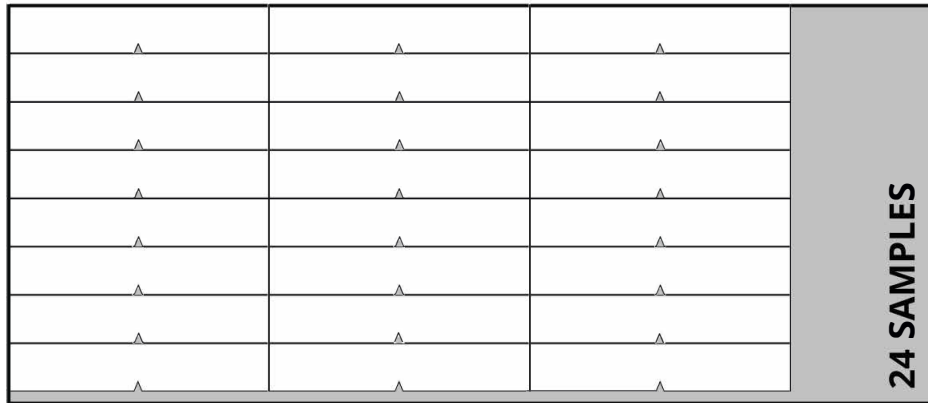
Cutting pattern of the Charpy test pieces out of the given MONICR plate.
